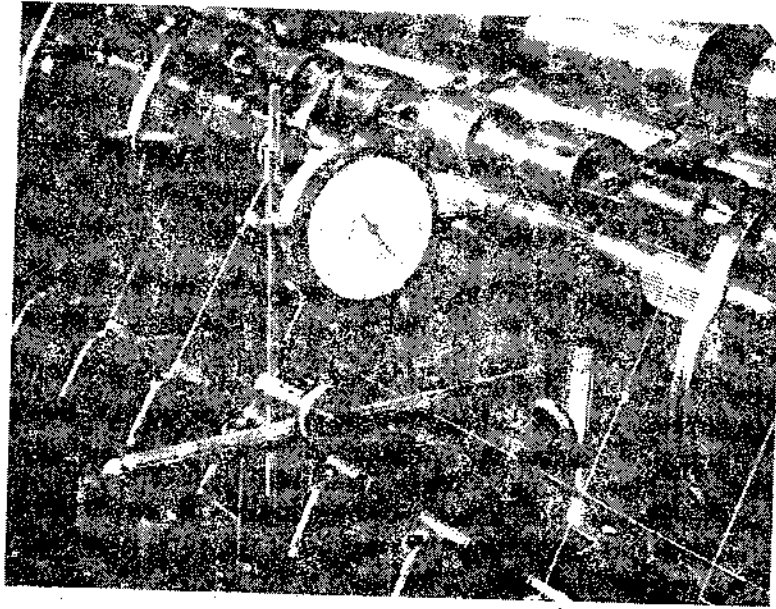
The 'Shirley' bottom roller eccentricity tester (By courtesy of B.C.I.R.A.)
